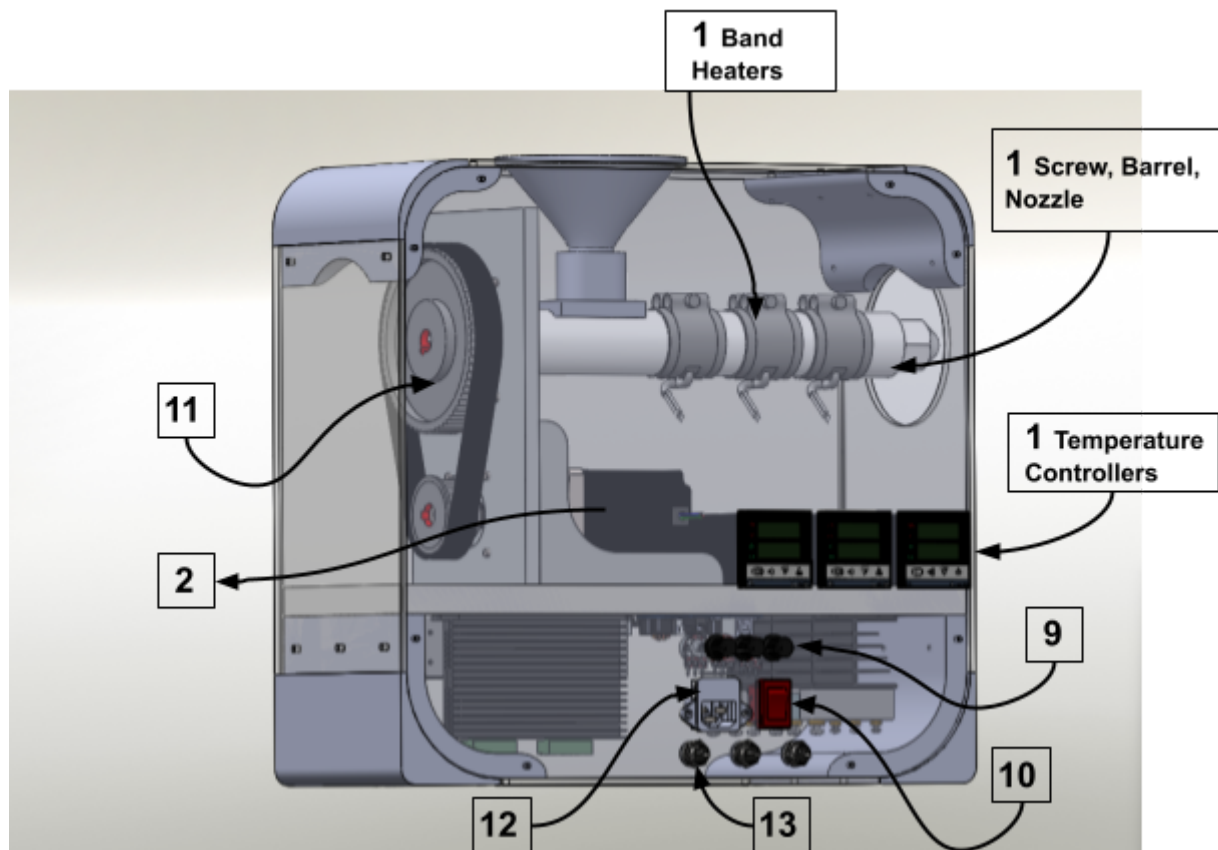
3D model of the extruder created with SOLIDWORKS highlighting the main electrical and mechanical components. The specs of the elements marked with the numbered boxes can be found in the Table 2
